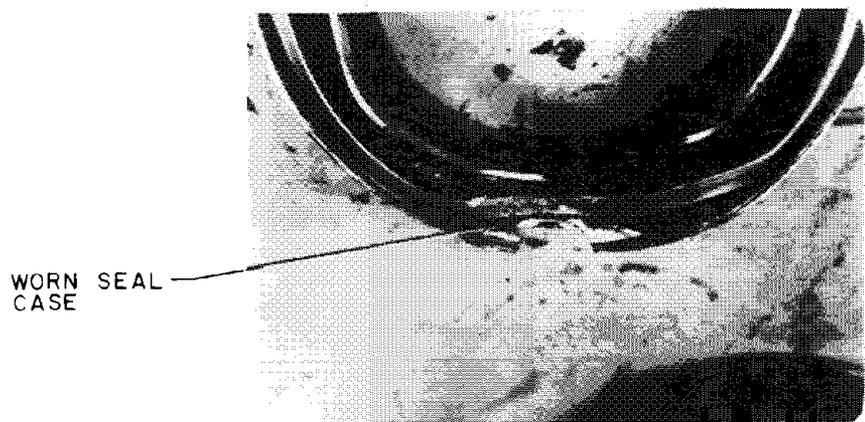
BEARING FP-6 AFTER 69.5 TEST HOURS SHOWING SEAL CASE AND CAGE WEAR WHICH CAUSED ECCENTRIC CAGE OPERATION
